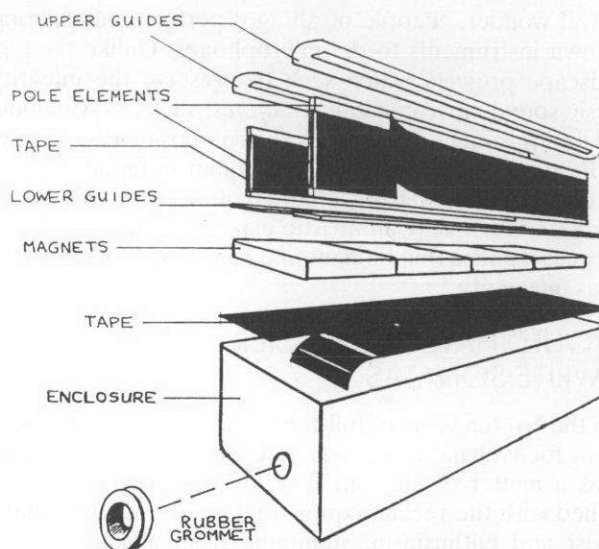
Structural components of pickup, shown in exploded diagram. The coil wire (not shown) will be wound over the electrician's tape covering the pole elements, with the guides above and below to keep it in place.
